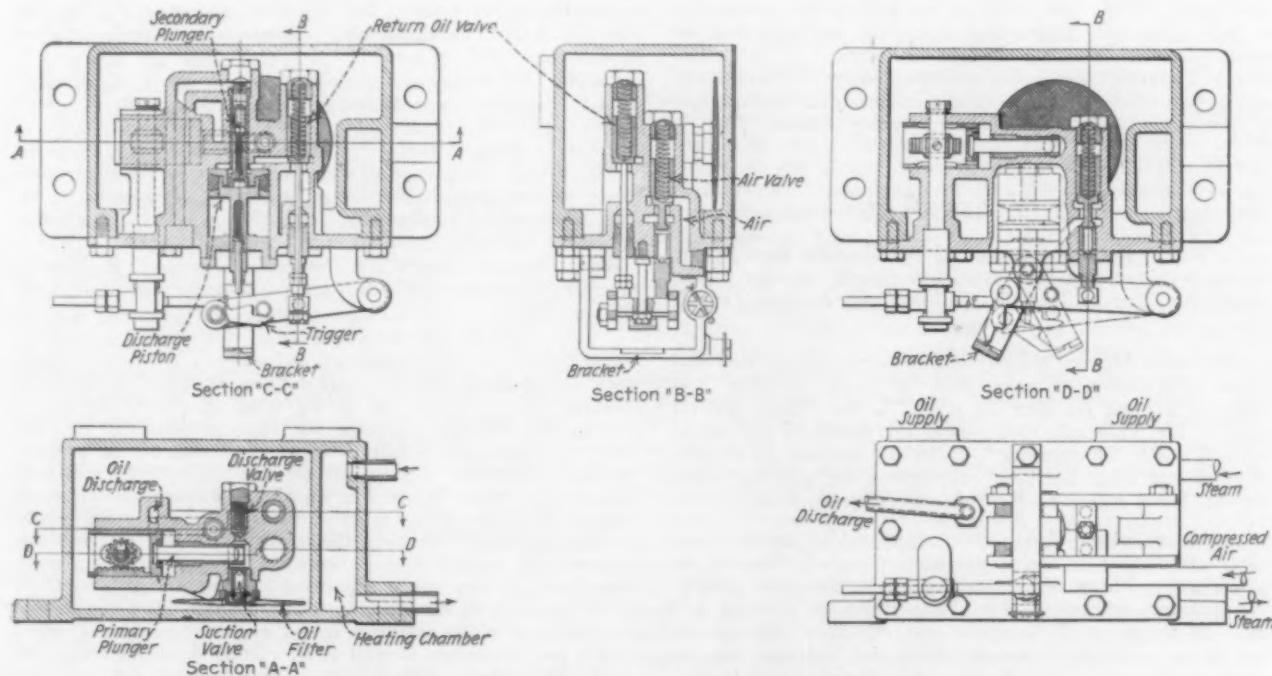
Sectional Views of the Boec Locomotive Cylinder Lubricator
